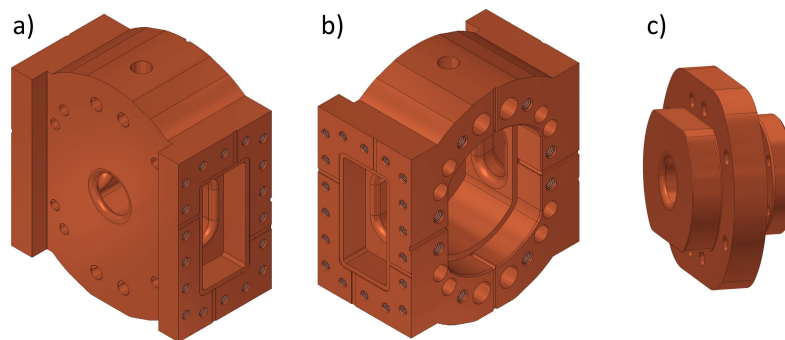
Mechanical drawings of the of the output coupler: front view(a), back view(b) and closing cap(c).
